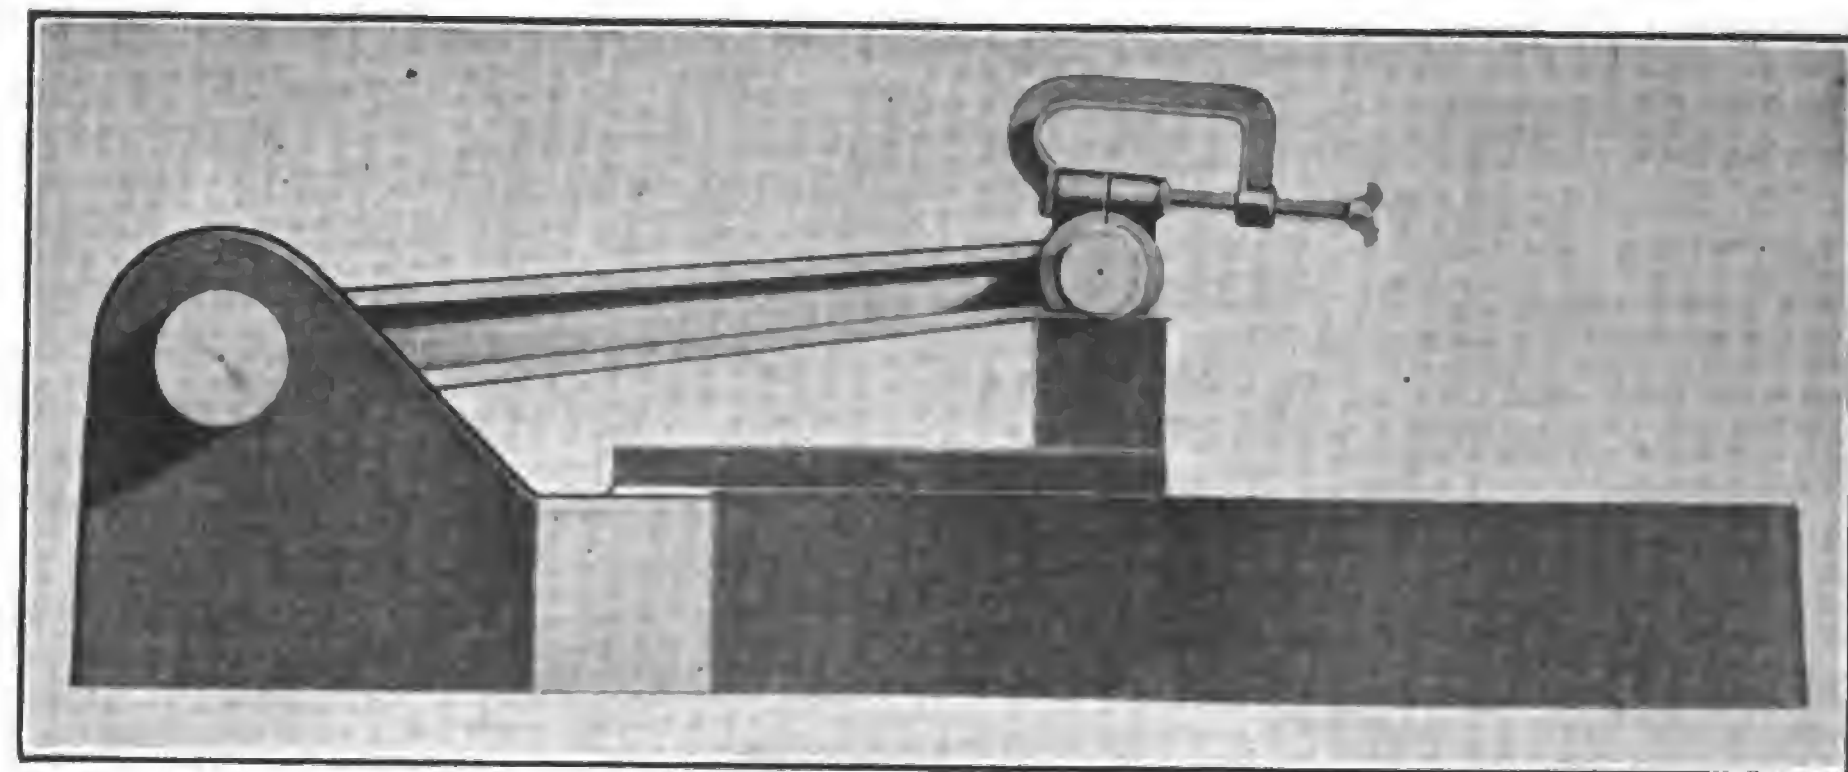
Phoenix Connecting Rod Aligning Gauge.
